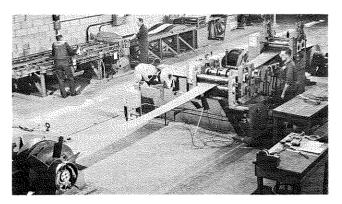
Both Leveling and Edge Trimming are Performed in One Operation on this Machine. The Windup Coil is in the Foreground.
